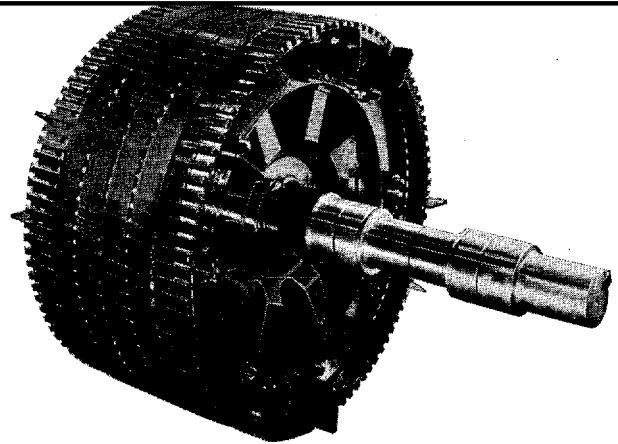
Squirrel-cage rotor construction typical of ratings beyond general-purpose sizes.
